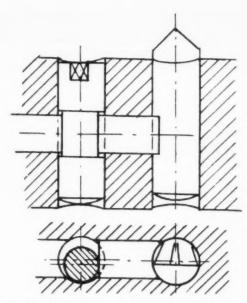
(Right) Eccentric shaft and cylindrical pad. Fig. 23. (Top Left) Split body with transverse slot.
